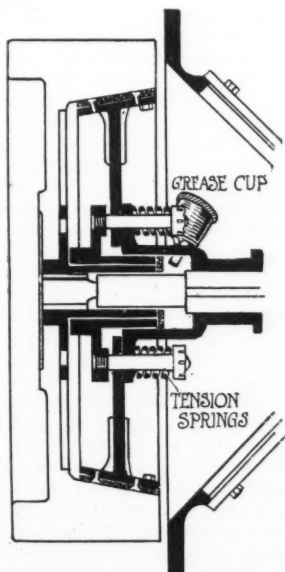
Section of cone clutch, illustrating application of tension springs on spider of clutch cone and common location of grease cup for oiling spindle
